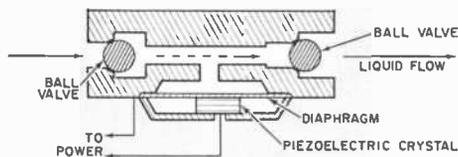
The possibility of igniting flammable liquids is reduced by this motorless liquid pump assembly developed by Precision Chemical Pump Corp.
